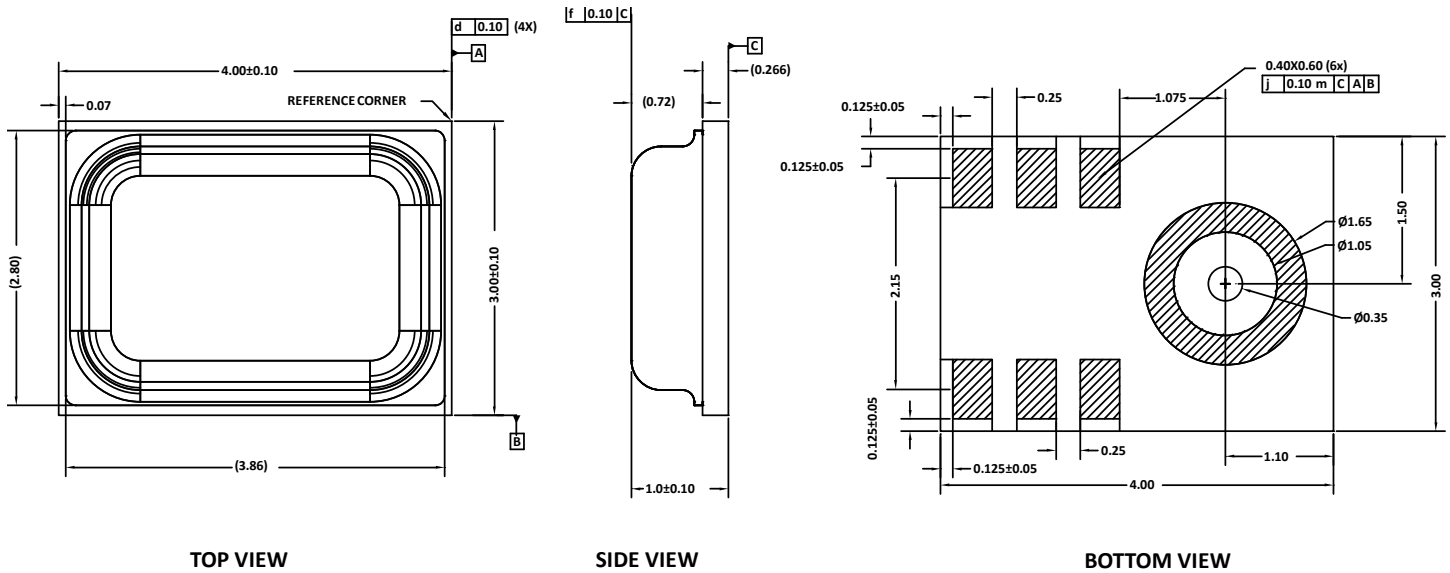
7-Terminal Chip Array Small Outline No Lead Cavity
